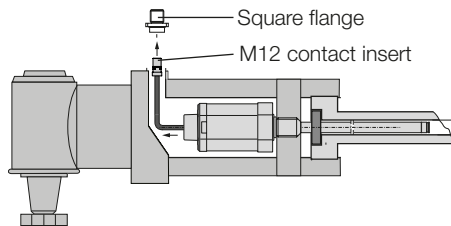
Plug-in system based on the example installing the transducer in a hydraulic cylinder
